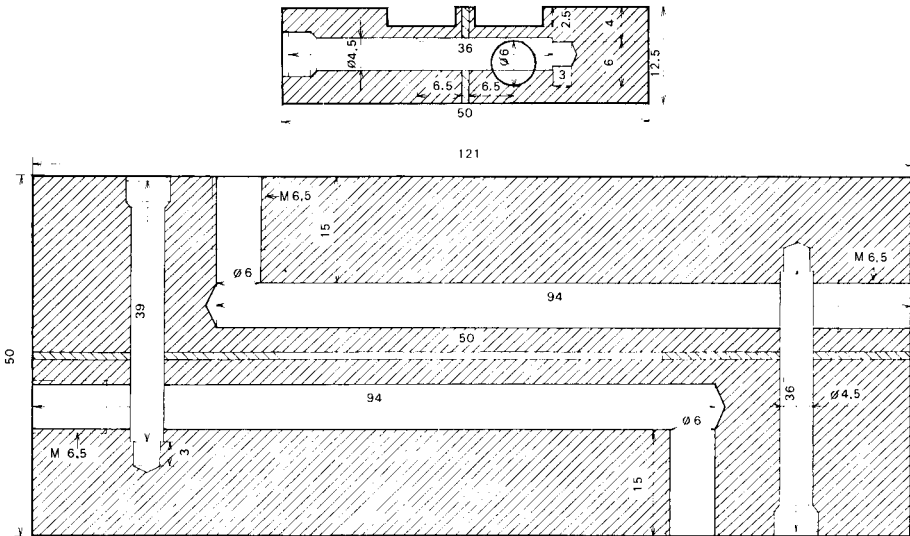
Cross-section of the water-cooled burner head. All dimensions are given in mm.
